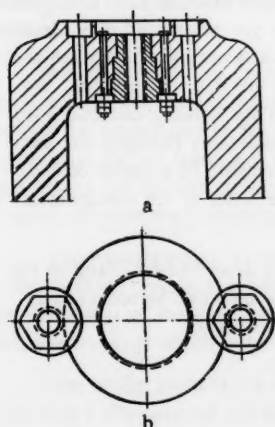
Fastening the three-step nut of screwdown gear. a) Press fit; b) by bolts.
